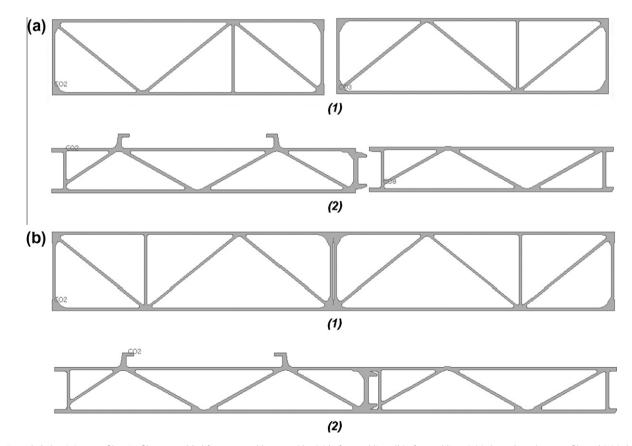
Extruded aluminium profiles. Profiles are welded from top and bottom side; (a) before welding; (b) after welding; (1) is hourglass shape profile and (2) is halfoverlap (truss, diagonal ribs).
